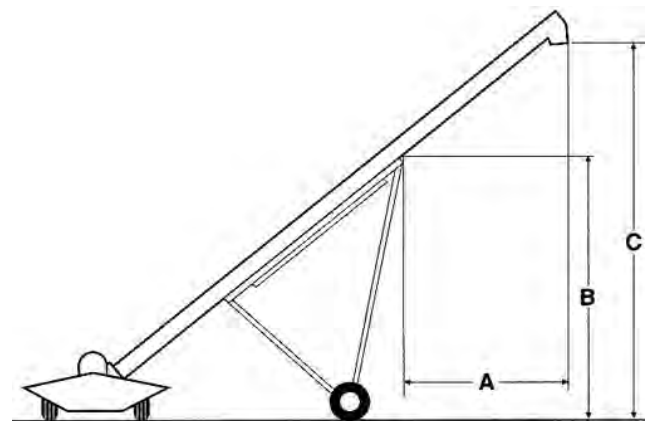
Dimensions: (A) Horizontal Reach (B) Bin Eave Clearance (C) Discharge Height.
